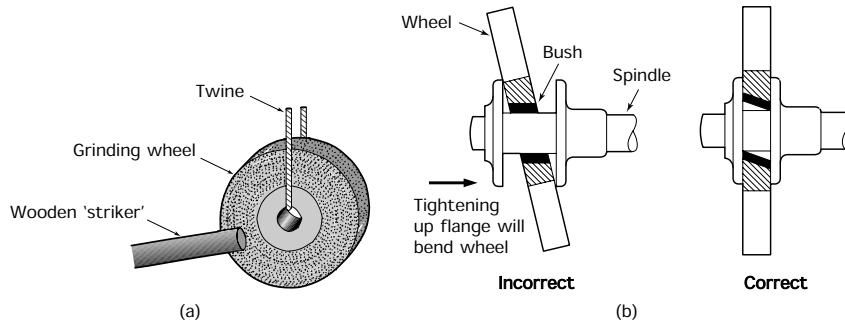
Mounting a grinding wheel (stage 2): (a) 'ringing' a grinding wheel; (b) fitting the bush: incorrect – if the lead bush in the centre of the wheel is too tight a fit on the spindle, there is a danger that the wheel will crack as the flanges are tightened up; correct – the bush is eased out with a three-square scraper until the wheel can float on the spindle, it will then pull up square with the fixed flange without cracking. (Note: The misalignment of the bush has been exaggerated for clarity)
